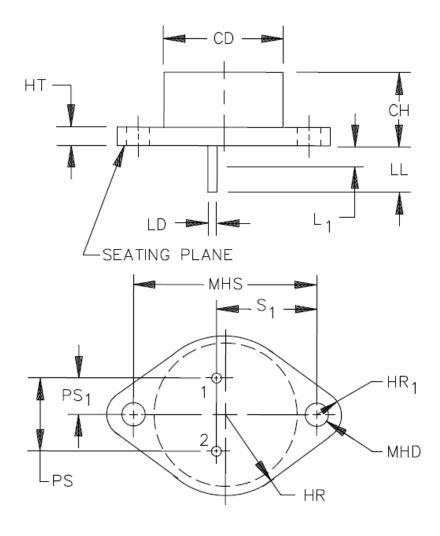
Physical dimensions (TO-204AA, formerly TO-3).
